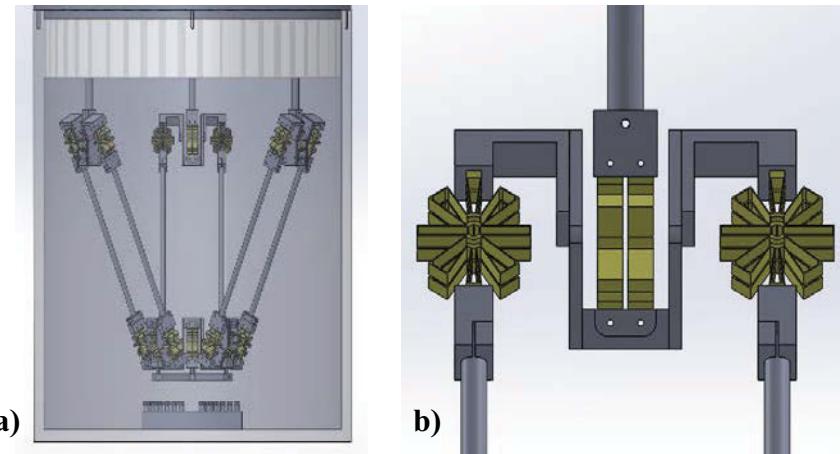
Prototype Geometry based on Robert Fowler's Flex-16 large-displacement compliant hinge
